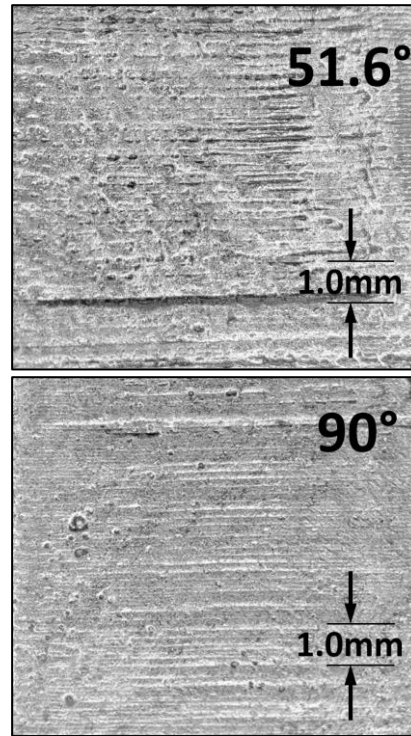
Cast samples showing facets with varying surface angles, 900 °C burnout.
